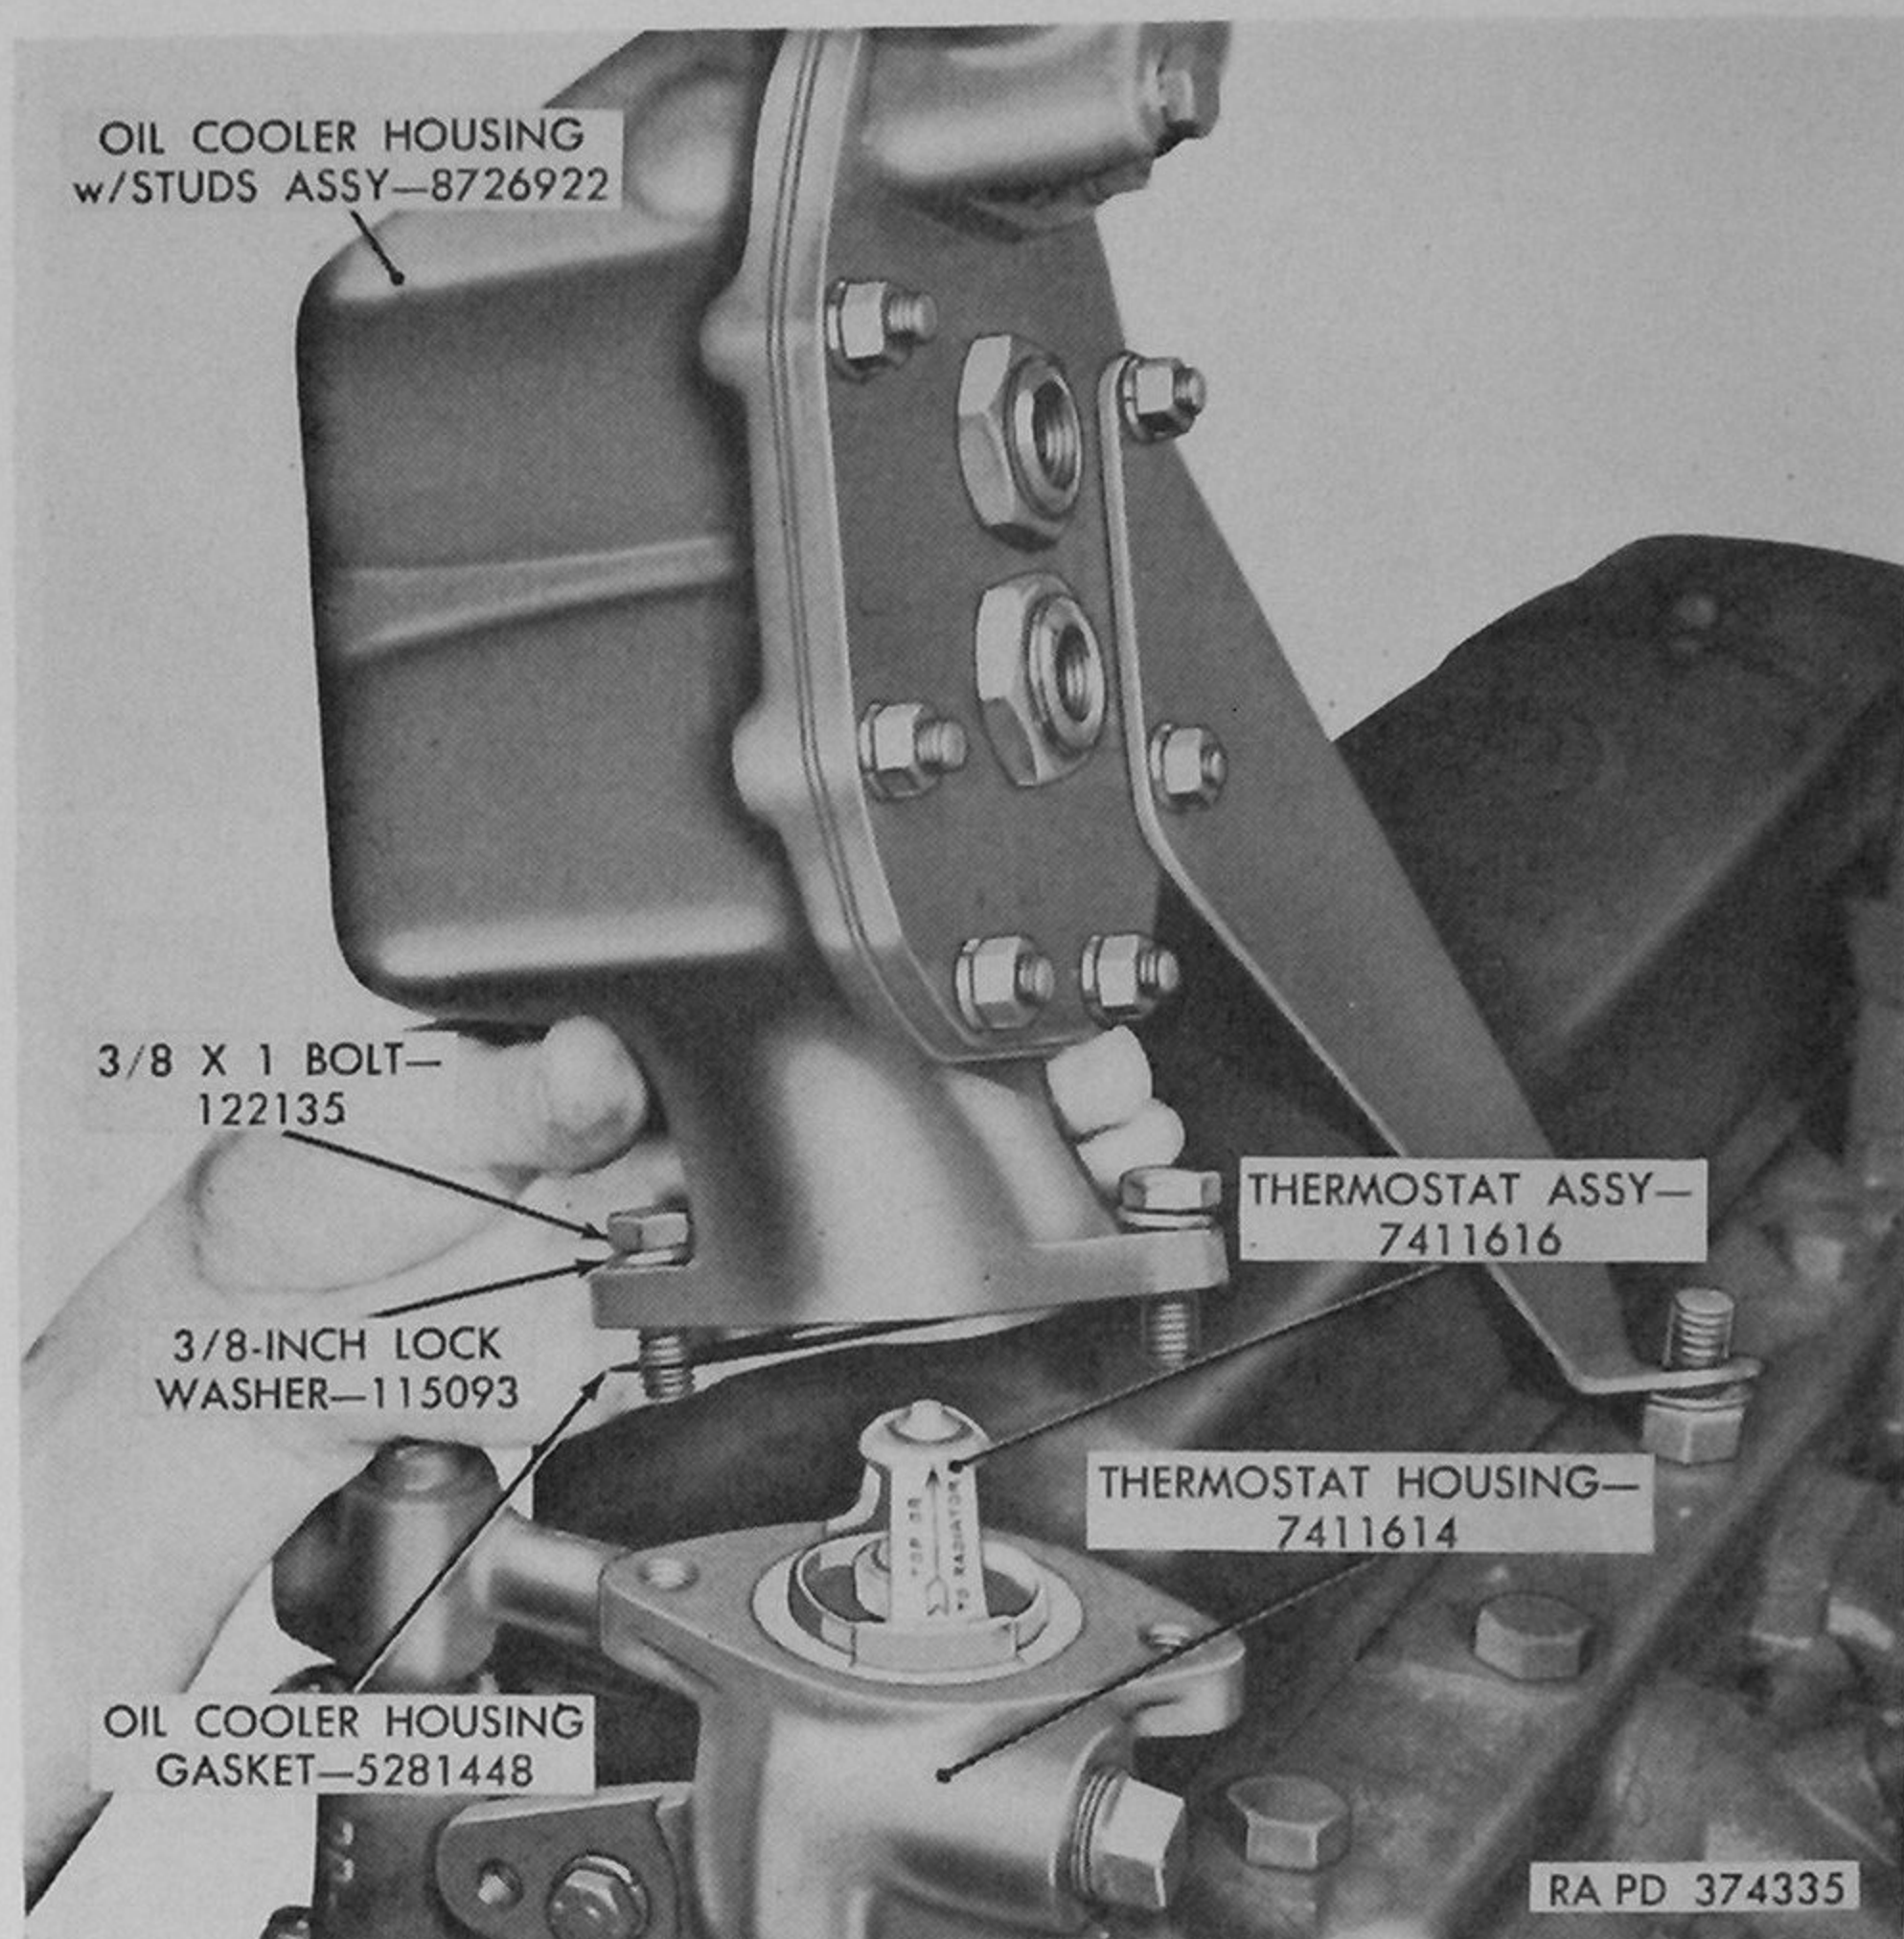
Removing or installing thermostat assembly—engine assembly 26920.
